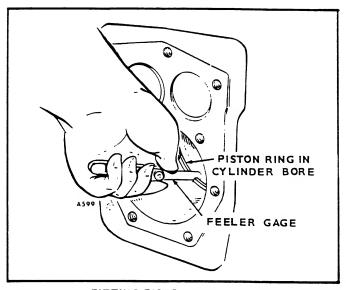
FITTING PISTON RINGS TO THE CYLINDER
